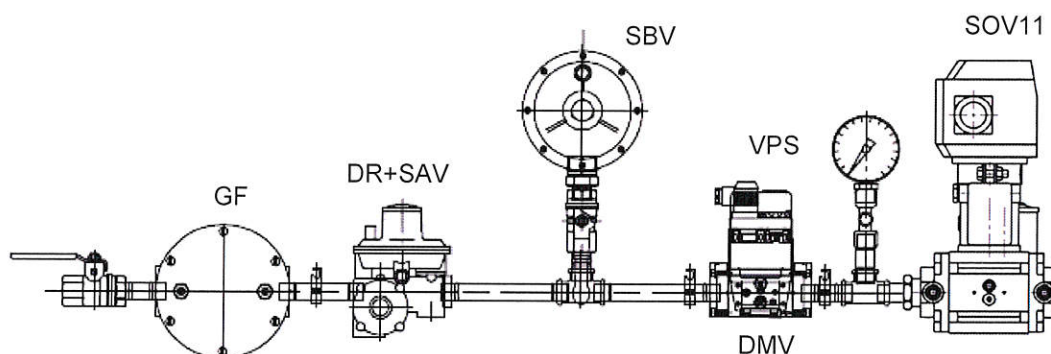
Front view of gas train for the CL.Air pad gas combustion unit
